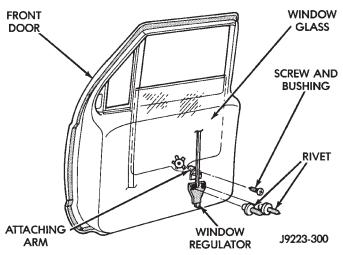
Manual Regulator Installation—Lower Rivets and Glass Retaining Screw
